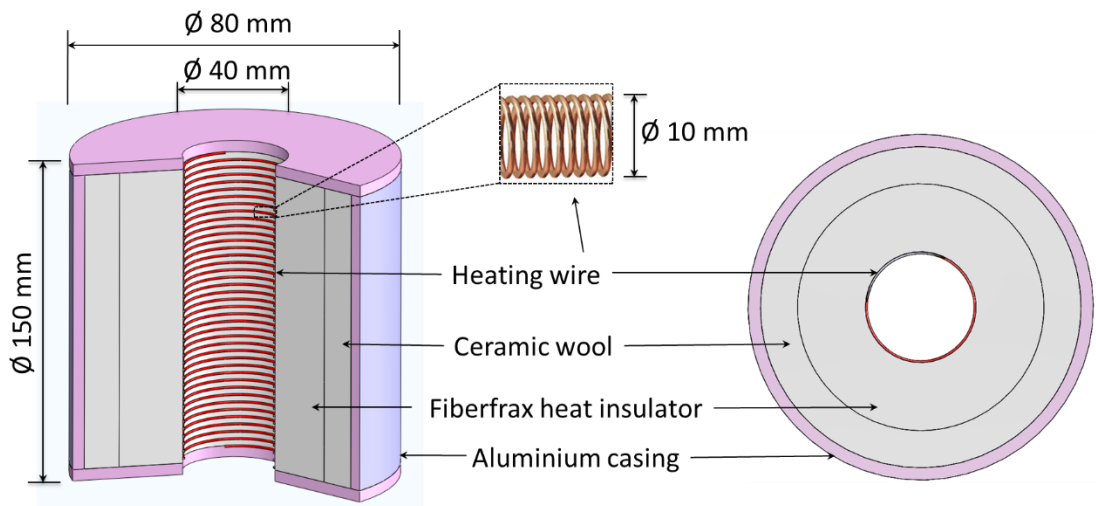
A CAD drawing, showing the dimension and the materials used for making the electric resistance furnace.
